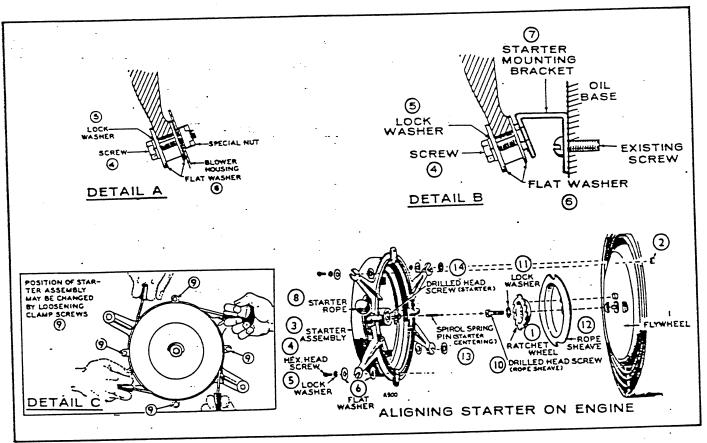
INSTALLATION OF READI-PULL STARTER
